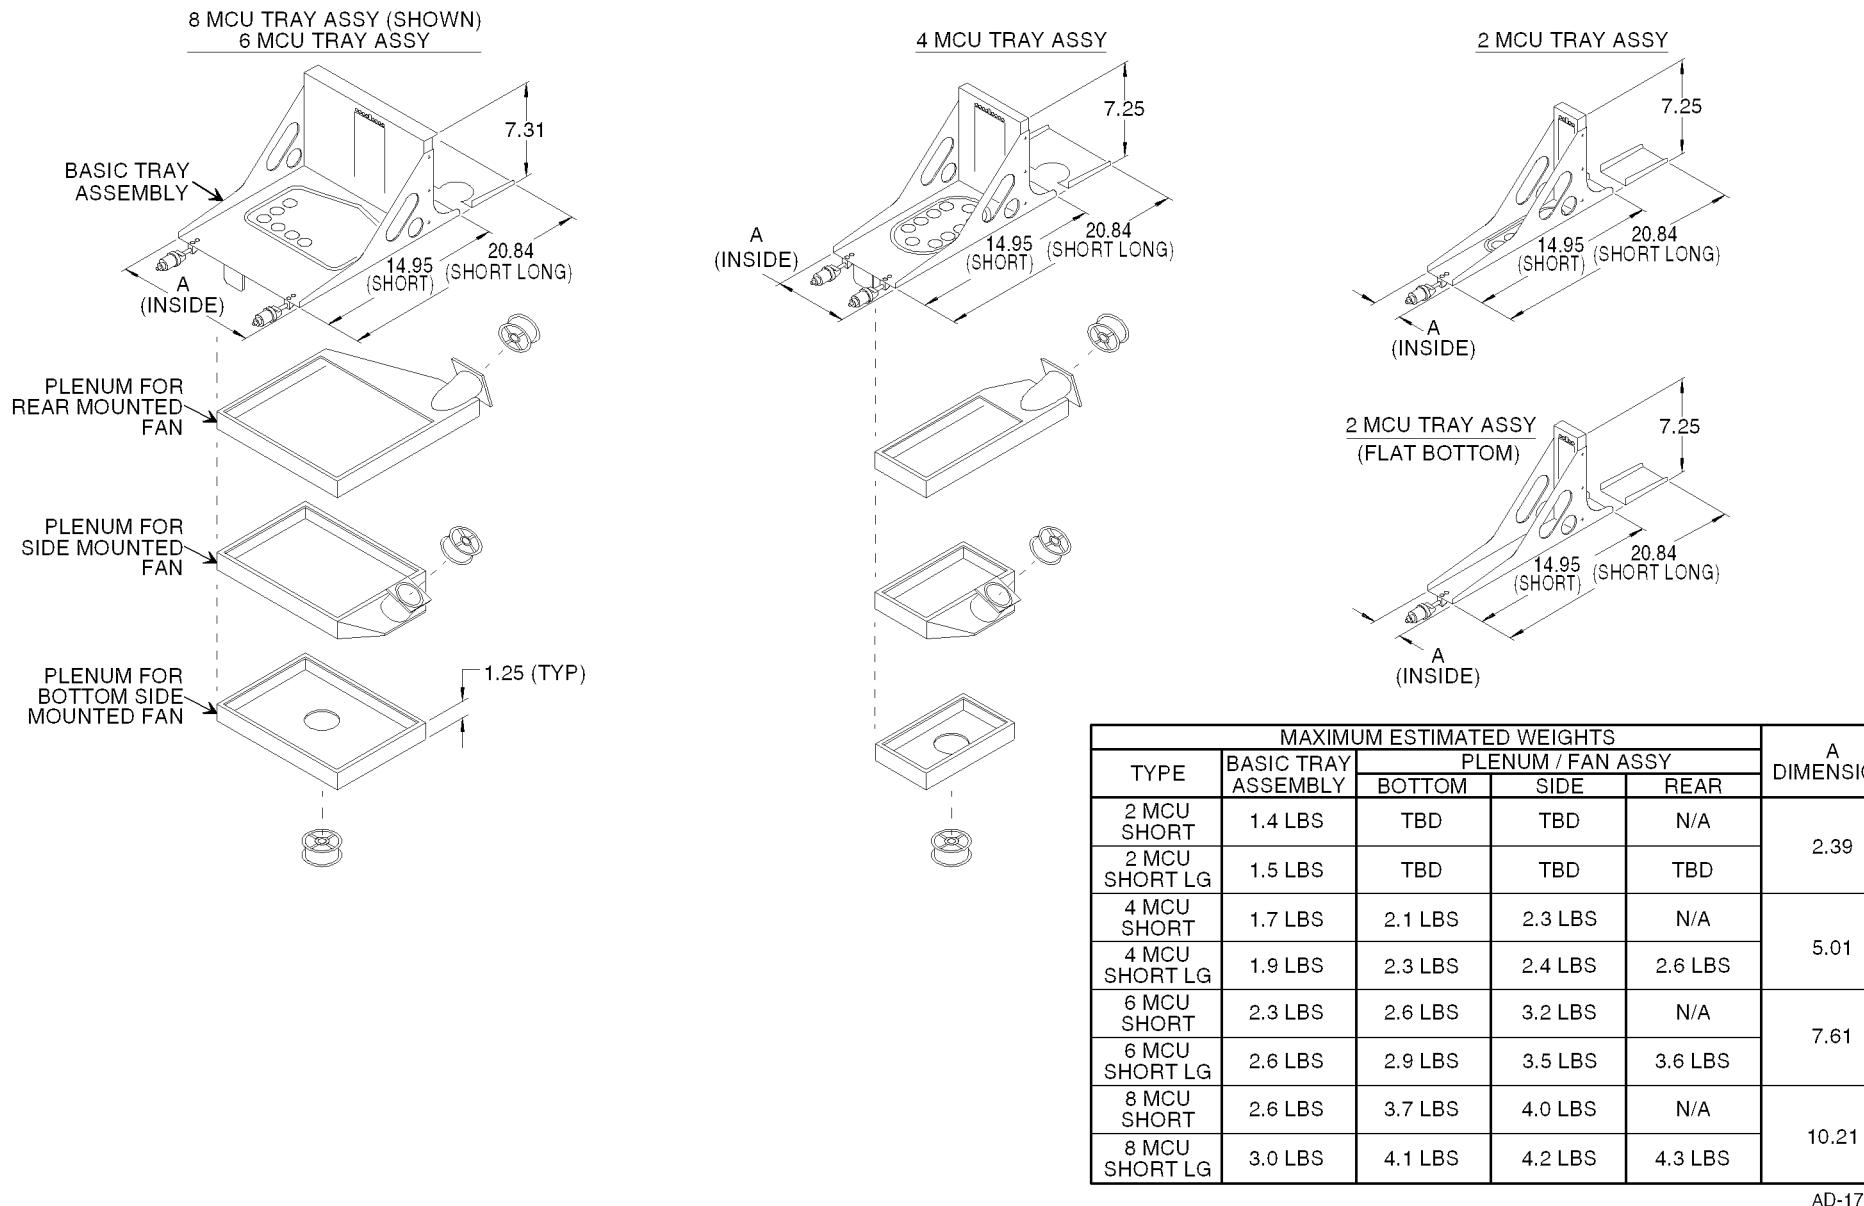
Dimensions for Hollingseed Tray Assemblies
